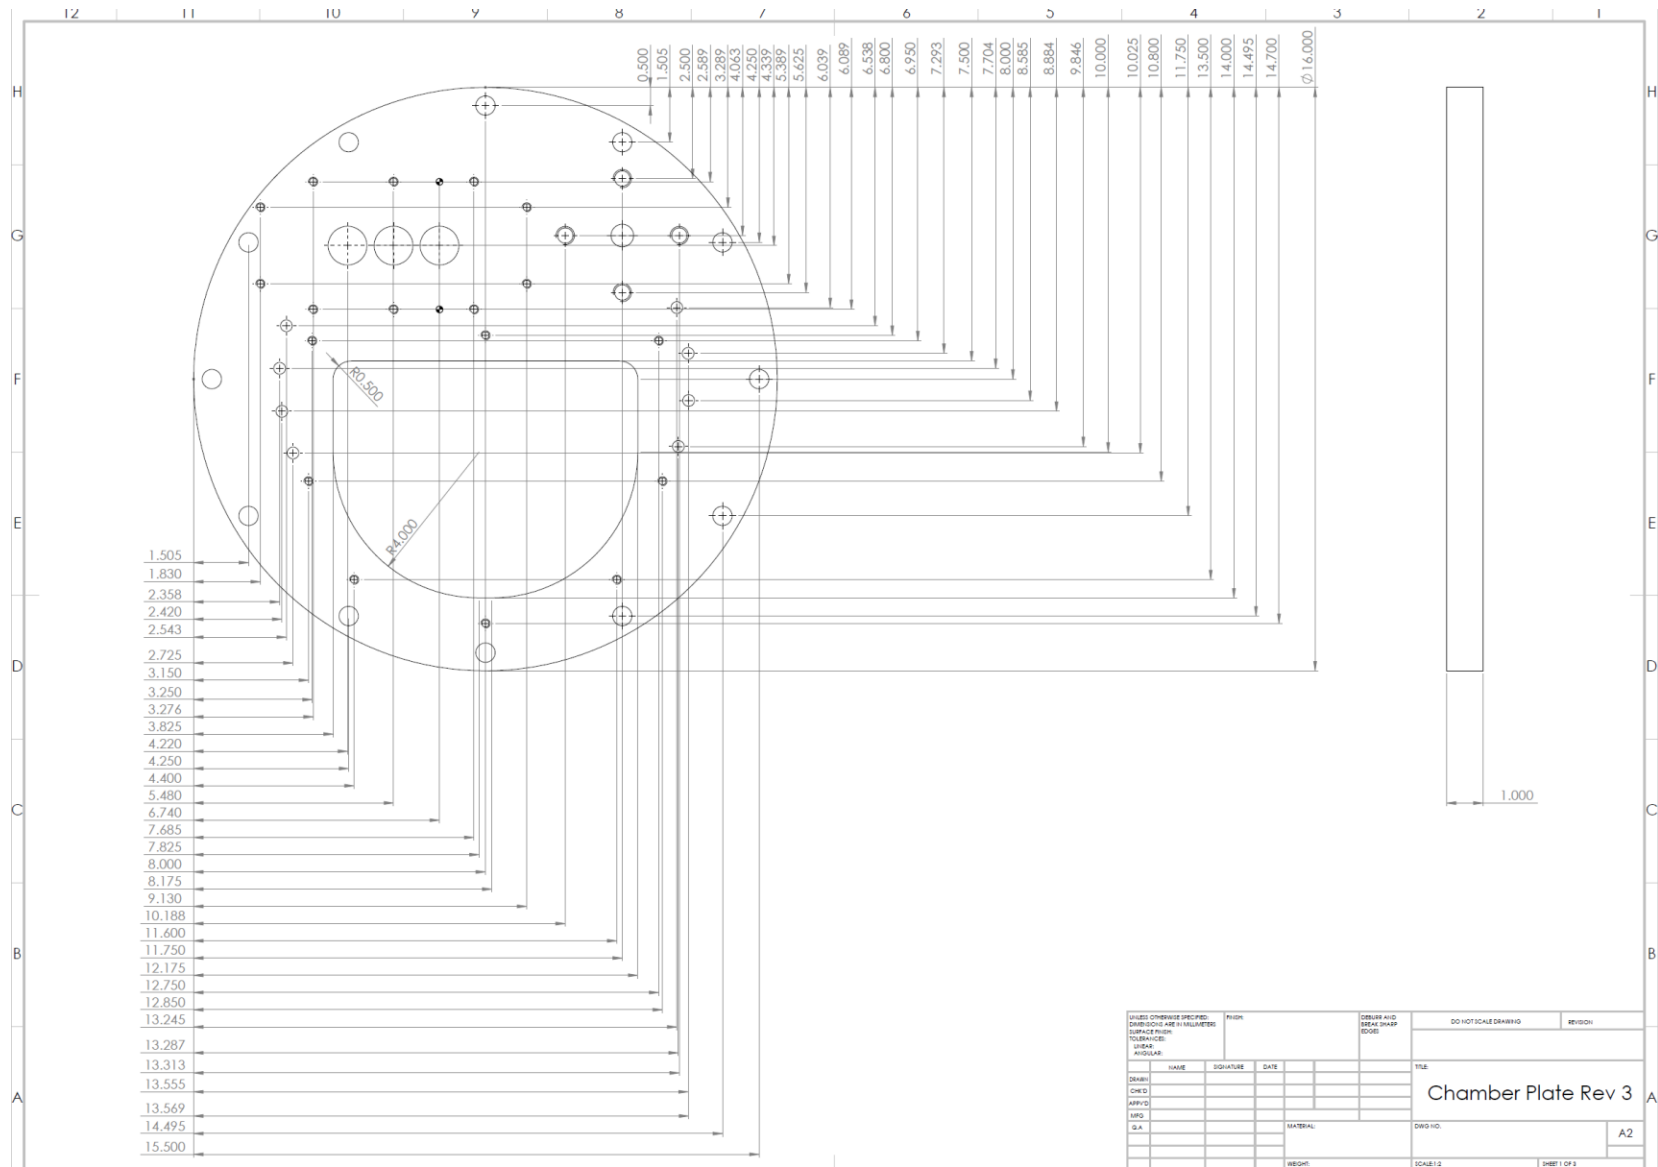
Vacuum flange that mates to the experimental test chamber.
